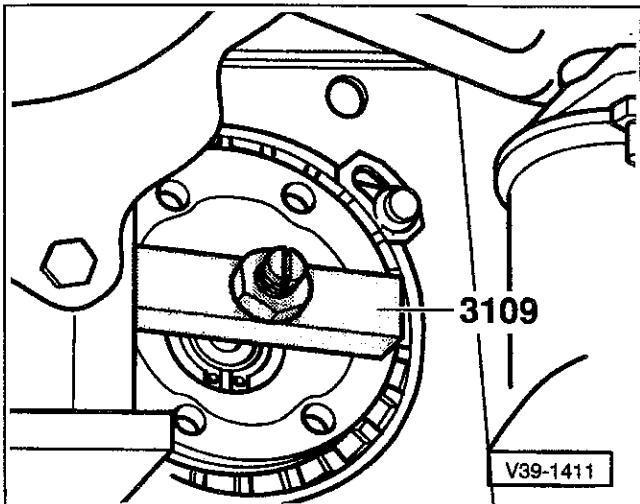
VW special tool no. 3109 being used to compress spring behind drive flange so that circlip can be removed.
